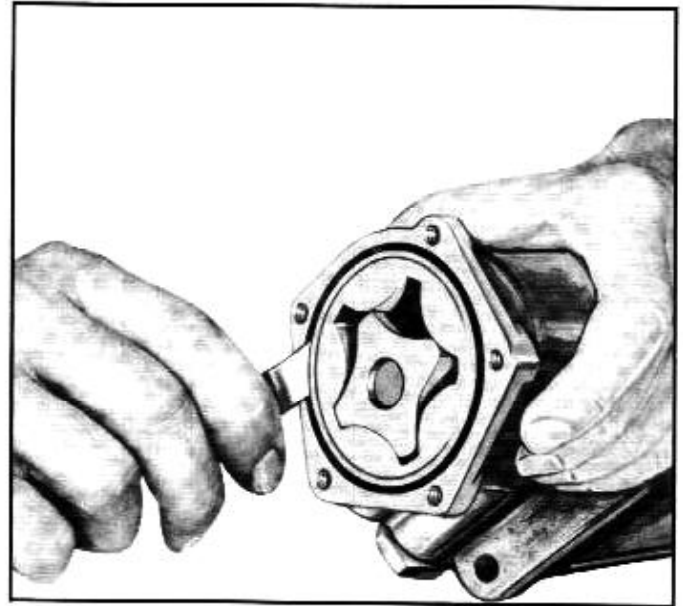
A-15—Checking Outer Rotor to Pump Body Clearance
